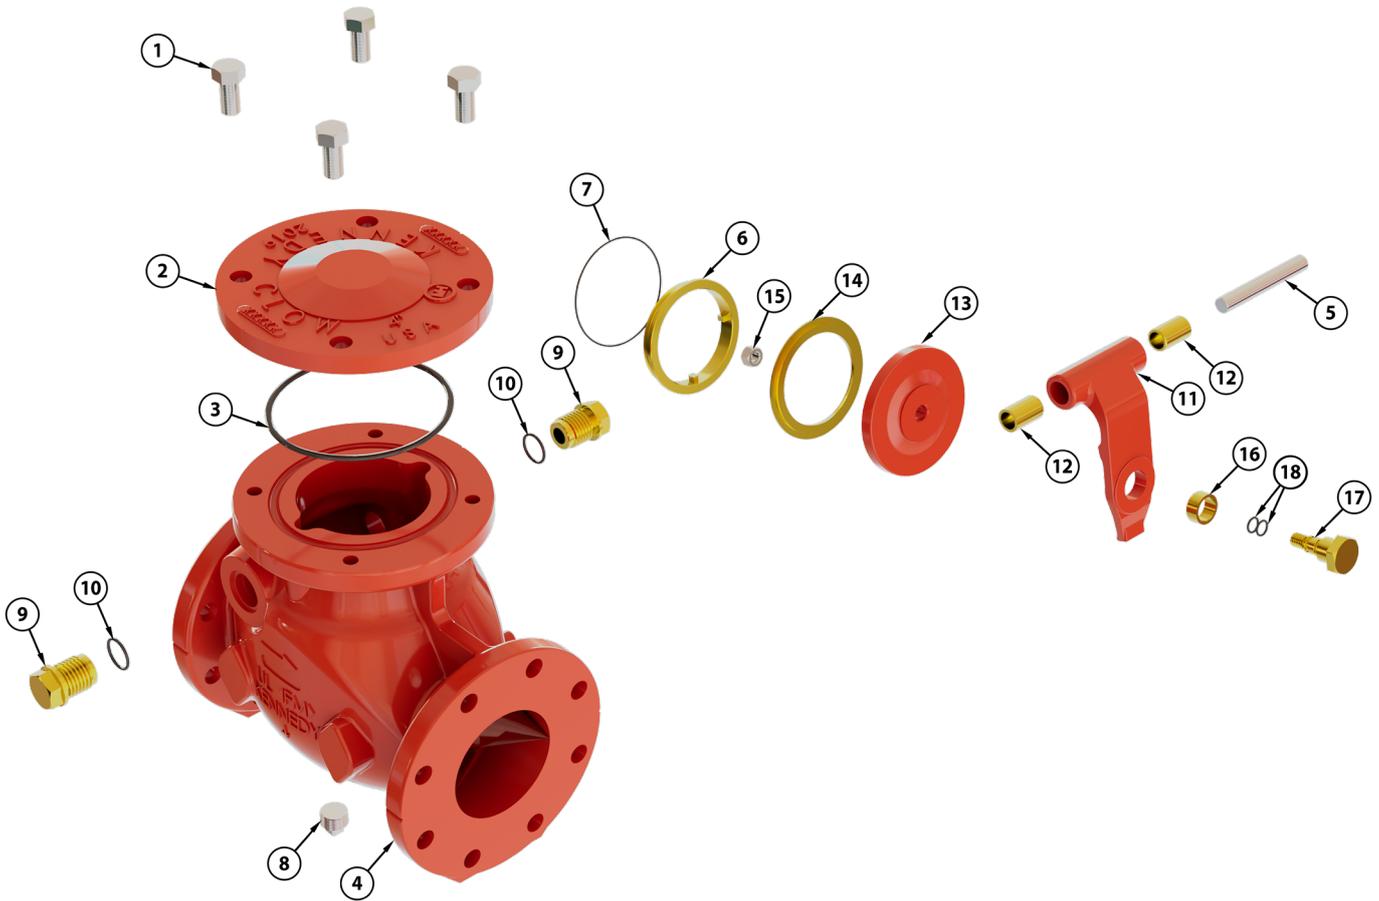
Bronze Face Disc Assembly: 4" - 12"
